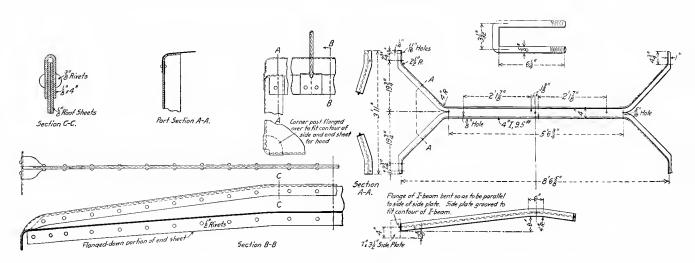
Details of Steel Roof for Summers All-Steel Box Car Shown in Figs. 263-266.
